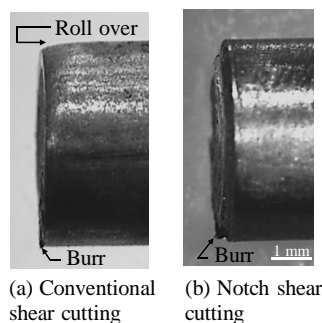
Side-view images of sheared wire rods cut by conventional and notch shear cutting.
